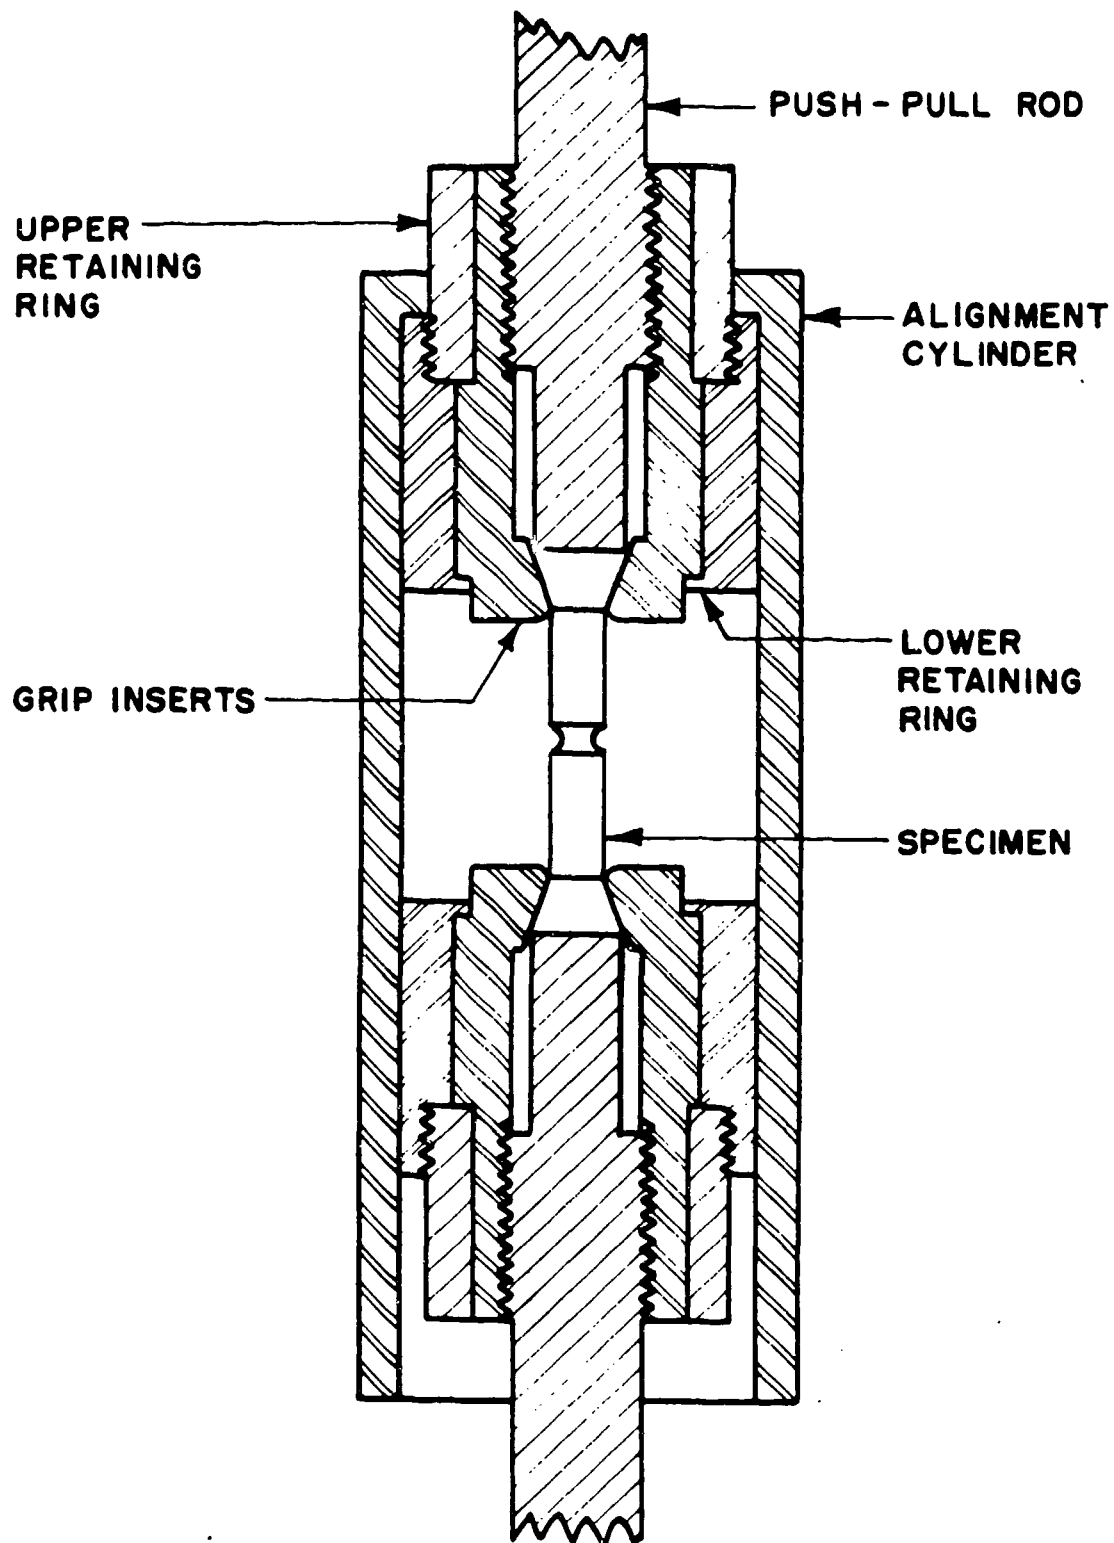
Schematic of Specimen Grips and Alignment Fixture
